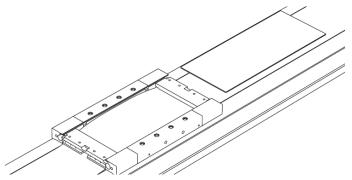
Disassembly/Assembly of cover strip deflection
